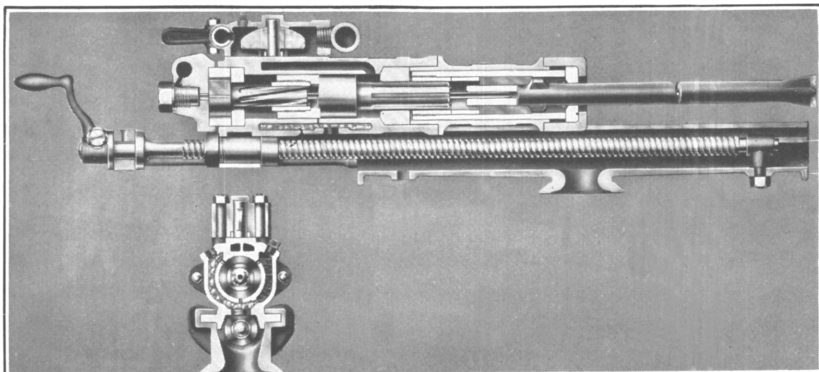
Section of piston rock drill. 1, Cylinder; 2, steam chest; 3, inlet port; 4, exhaust ports; 5, reverse ports; 6, valve; 7, valve bushing; 8, buffer; 9, check nut; 10, top head; 11, oil chamber; 12, ratchet ring; 13, rifle bar; 14, ratchet; 15, plug; 16, feed nut; 17, lock washer; 18, check nut; 19, washer; 20, feed handle; 21, yoke; 22, feed screw; 23, shell; 24, trunnion; 25, lower head; 26, clamp bolt; 27, bushing; 28, gland; 29, packing; 30, piston; 31, clamp bolt; 32, chuck bushing; 33, chuck button; 34, piston rings; 35, cylinder ports.
